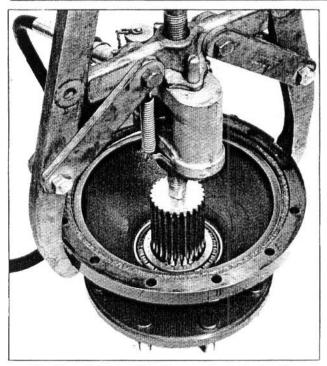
Removing Drive Cover and Axle Bearing Cone
